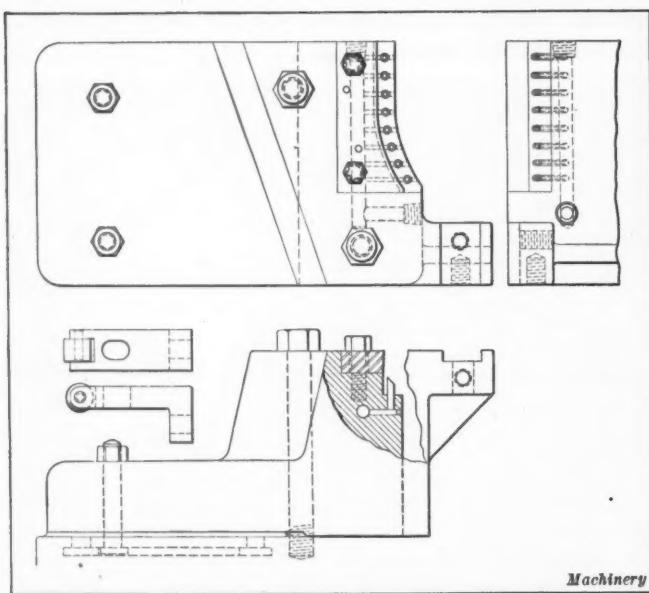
Holder for Forming Tool which finishes Shell Nose
